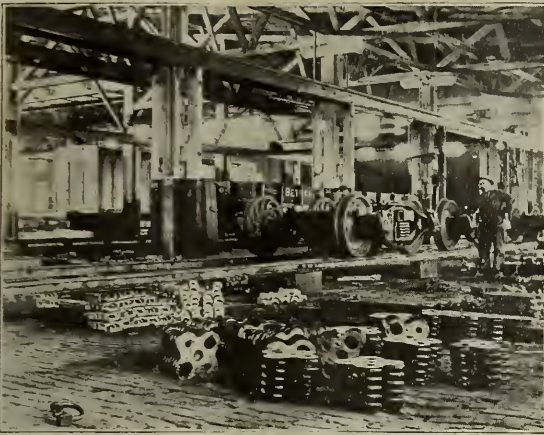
VIEW IN TRUCK ASSEMBLING DEPARTMENT.
